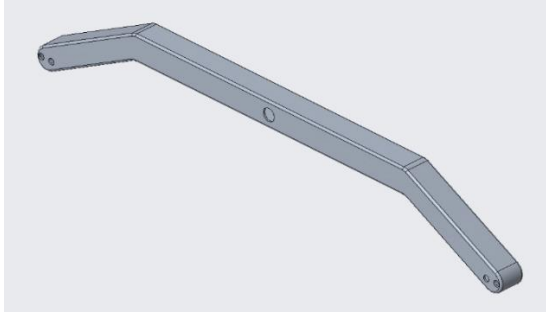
CAD Model of Right Frame Assembly Figure 38: Manufactured Right Frame Assembly
